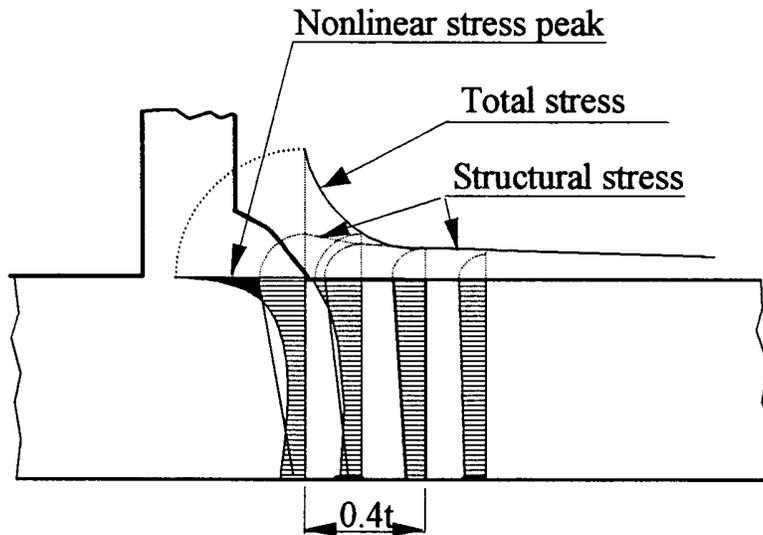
Local Stress Concentrations in Fillet Weld
